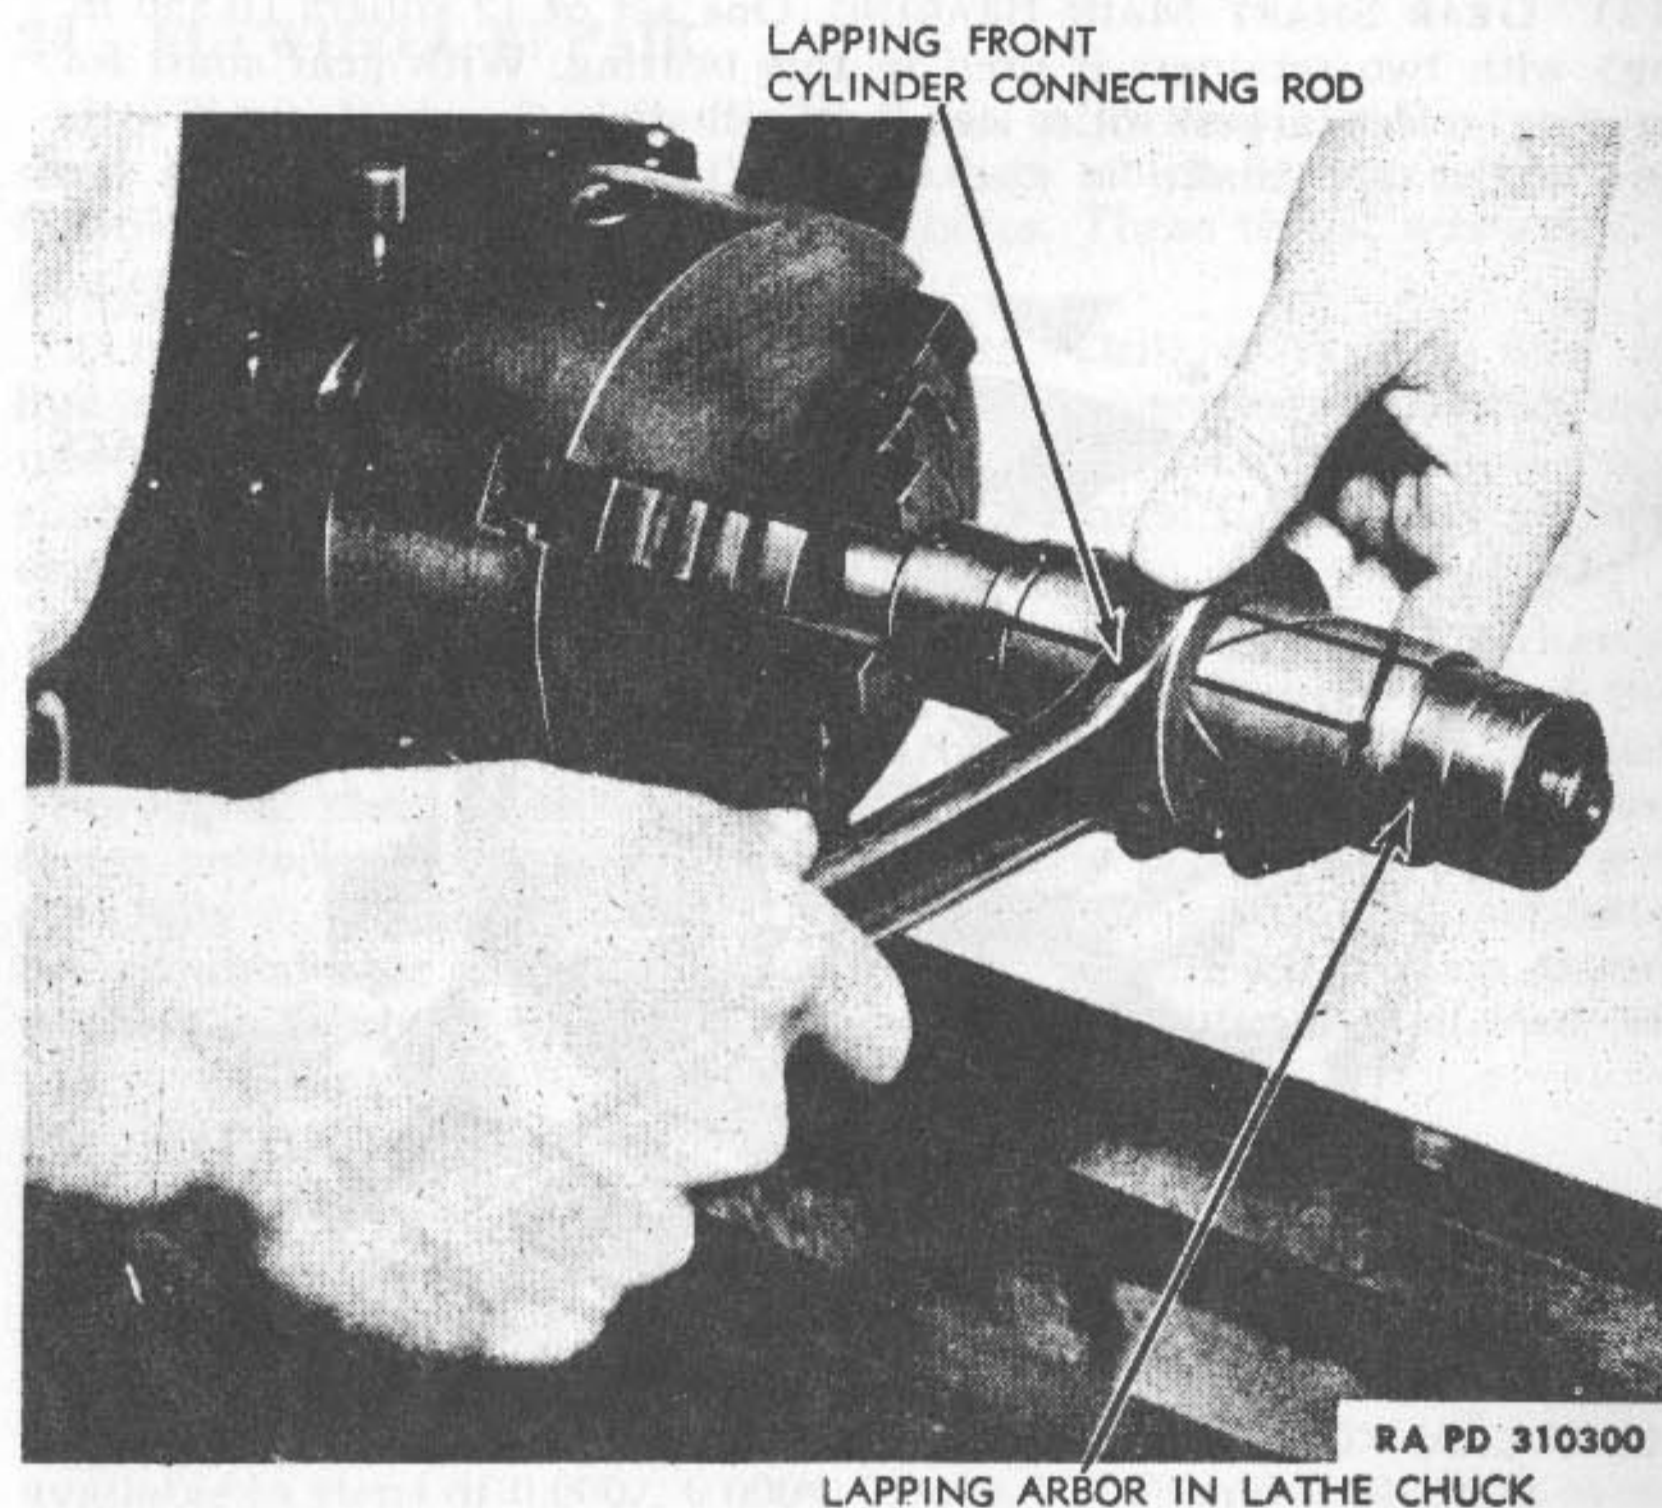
Lapping Connecting Rod Roller Race with Lapping Arbor (41-A-337-10)
